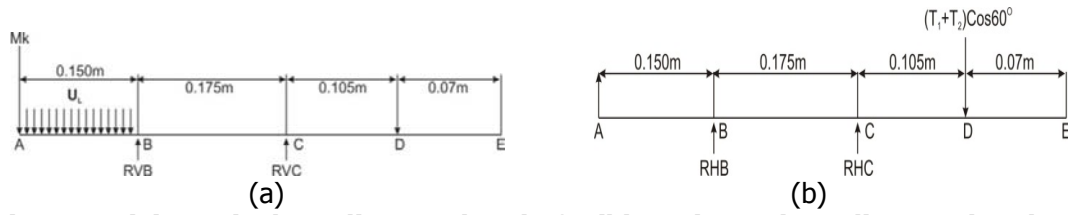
(a) Vertical Loading on the Shaft. (b) Horizontal Loading on the Shaft
